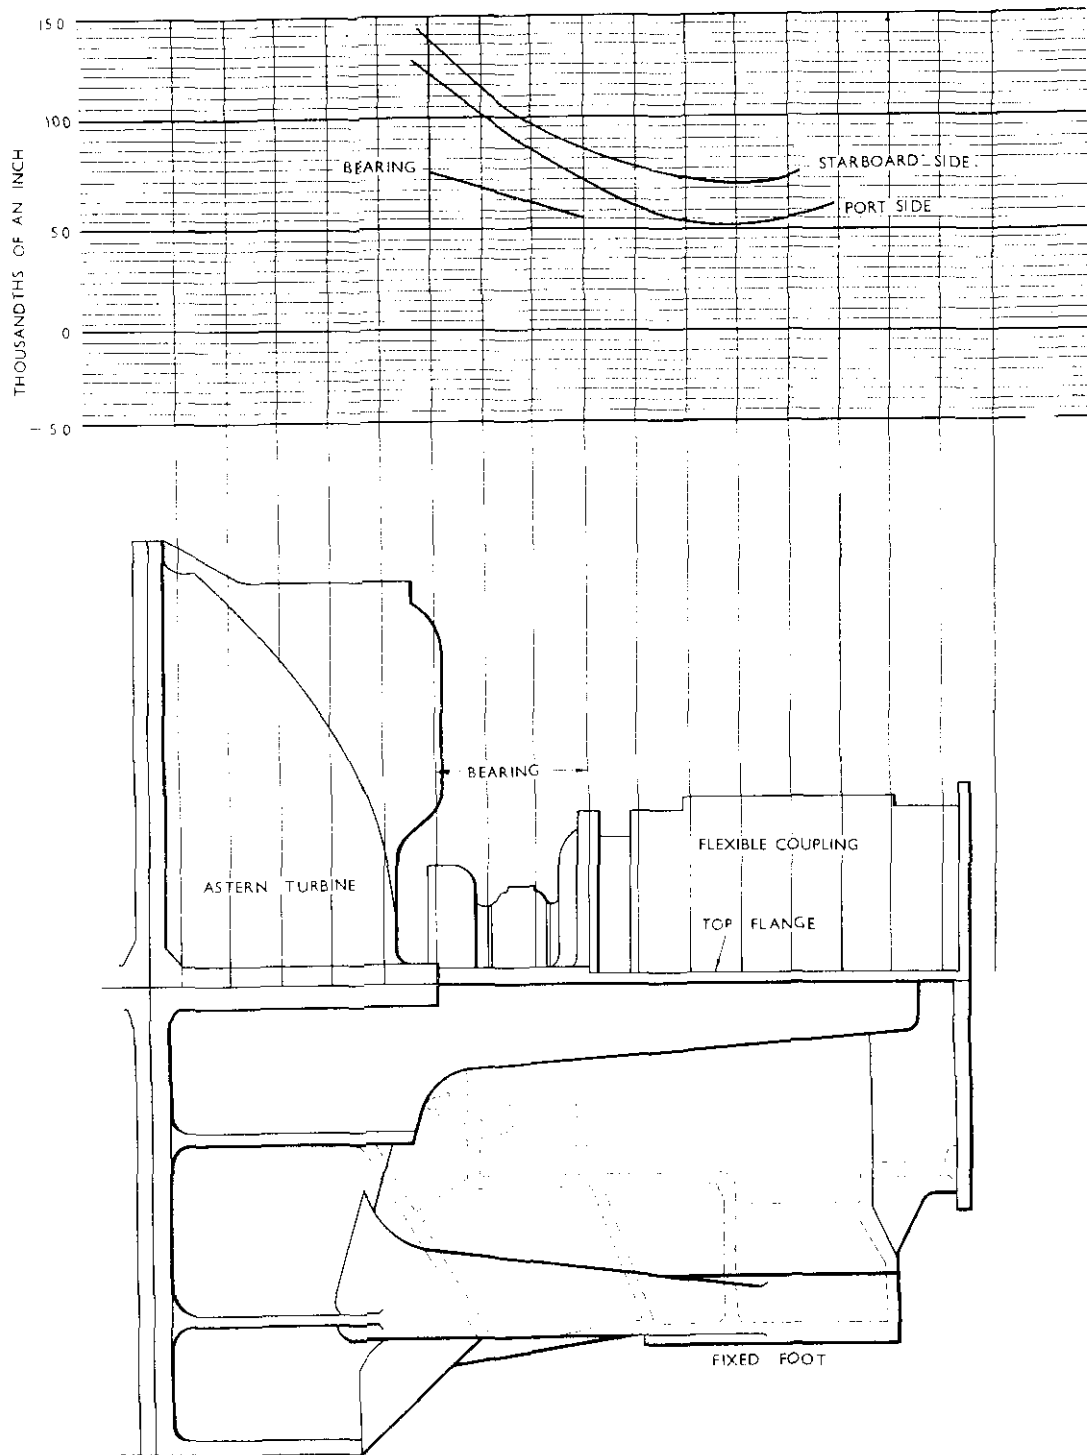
DISTORTION DIAGRAM SHOWING HOT SHAPE OF TOP FLANGE OF CASTING
